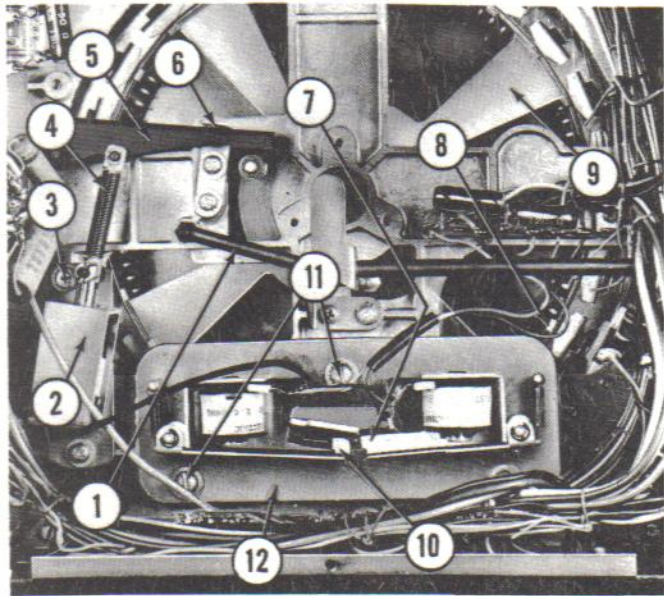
ELECTRIC SELECTOR ASSEMBLY - 2504
